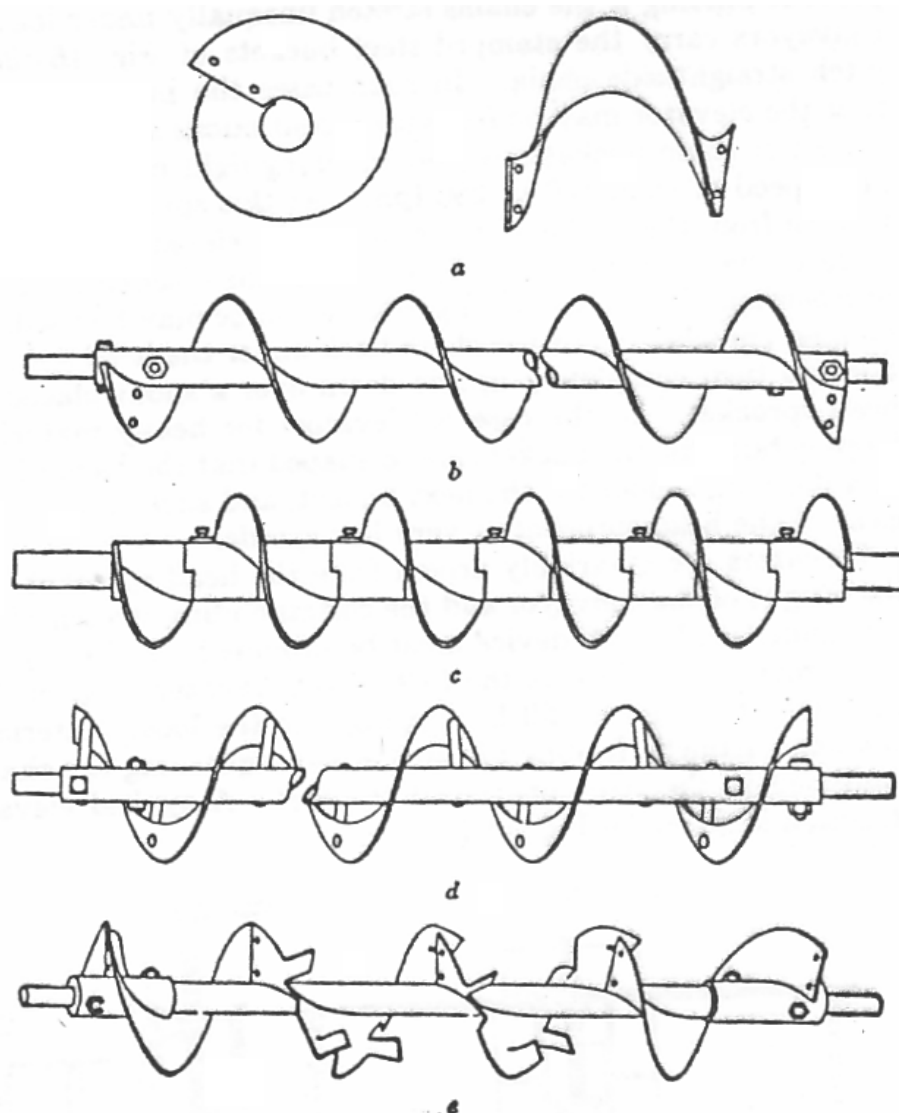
Screw-conveyor flights: (a) sectional; (b) helicoid; (c) cast iron; (d) ribbon; (e) cut flights.
